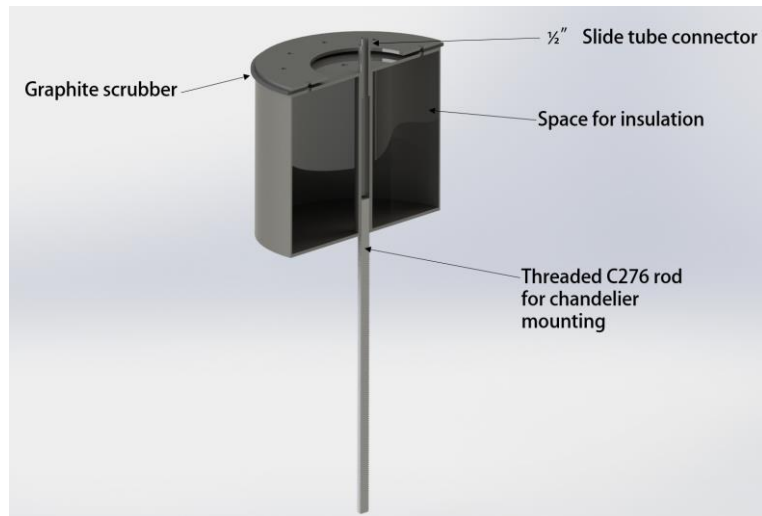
Top of Flange with Sliding Rod and Reducing Union
